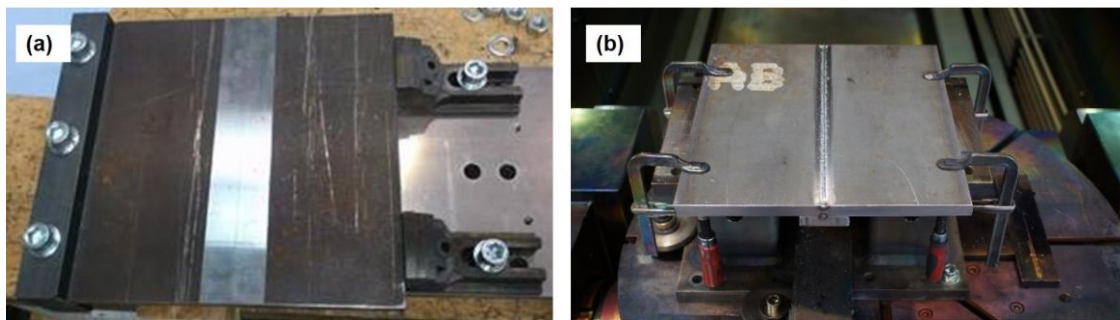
(a) Clamping device and (b) clamp configuration in EB welding of S960QL & S960M specimen
